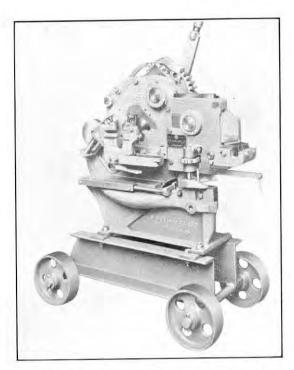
Shearing and Cropping Machine; F. J. Edwards, Ltd.
